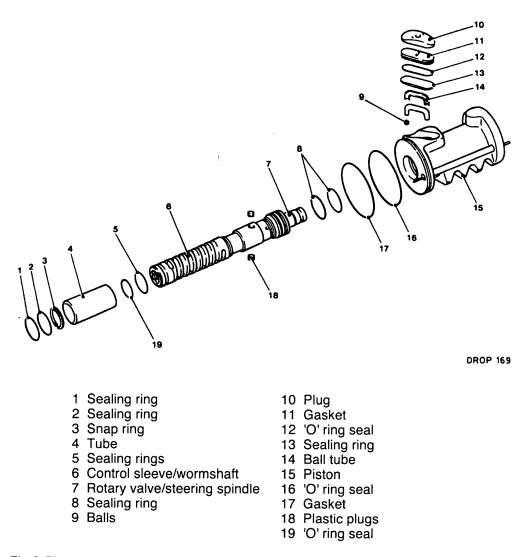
Piston, control sleeve/wormshaft and rotary valve/steering spindle assembly
